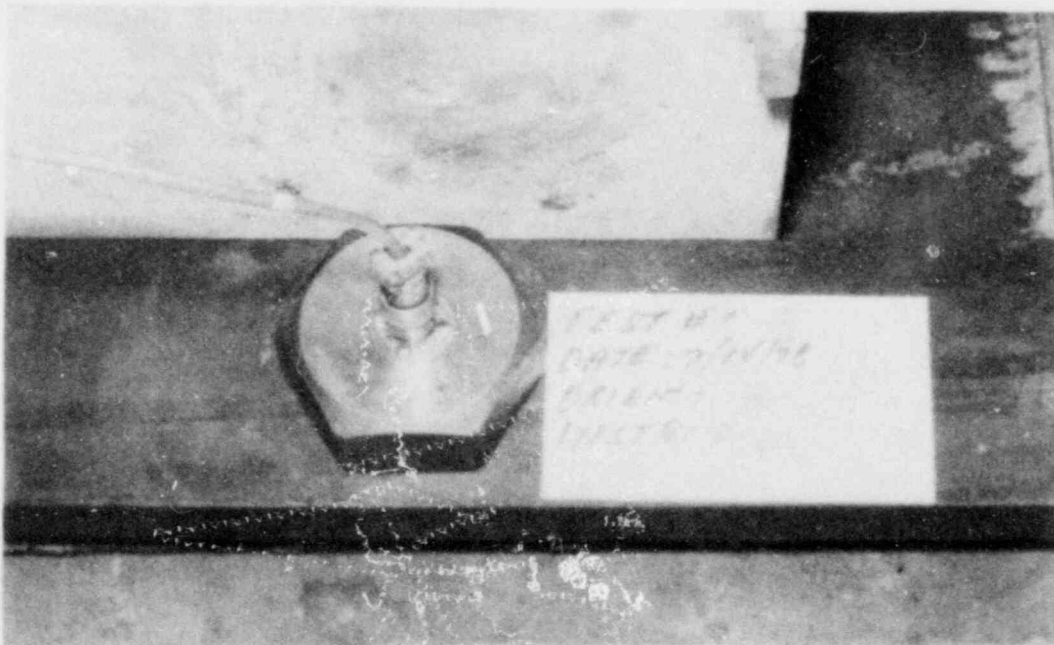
Vertical Tiedown Bolt at Far End of Hallum Cask Skid - Tests 1-4
